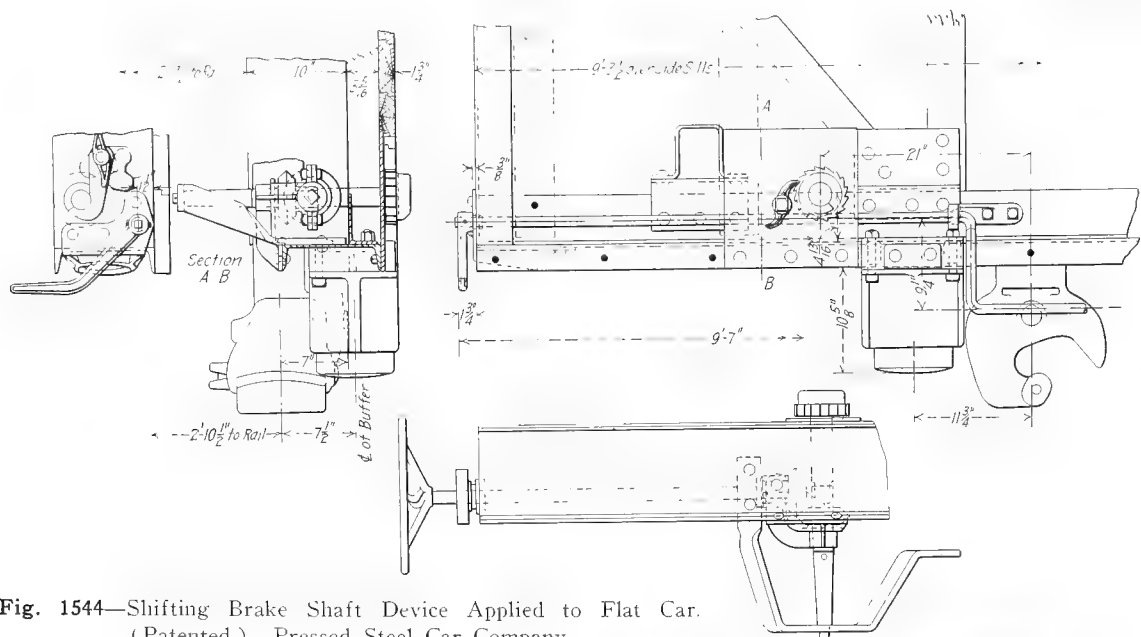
Shifting Brake Shaft Device Applied to Flat Car. (Patented.) Pressed Steel Car Company.
